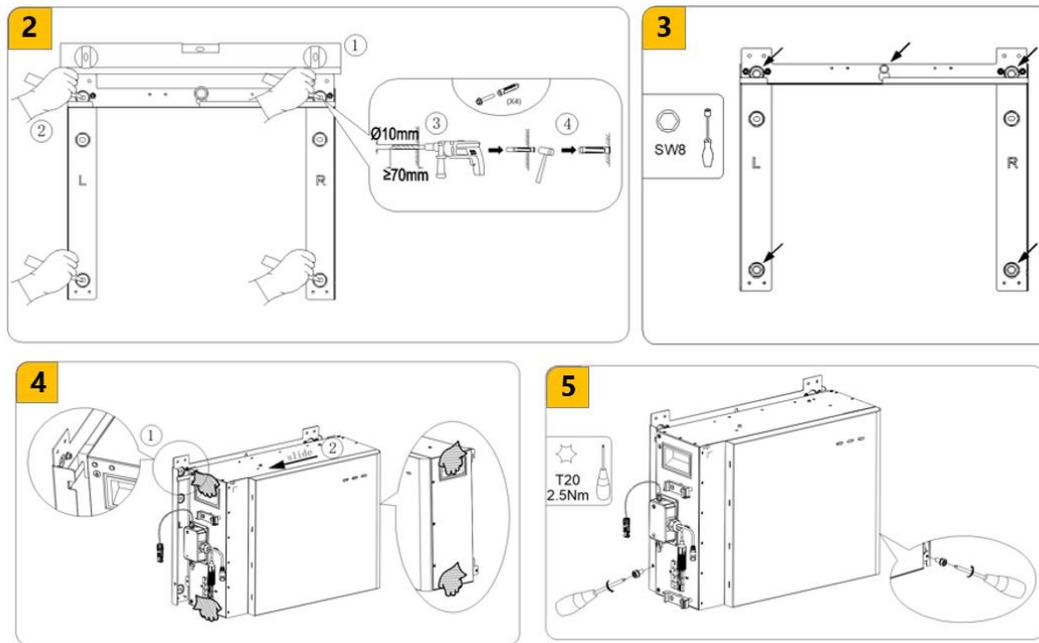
Installation diagram of a single battery wall-mounted bracket
